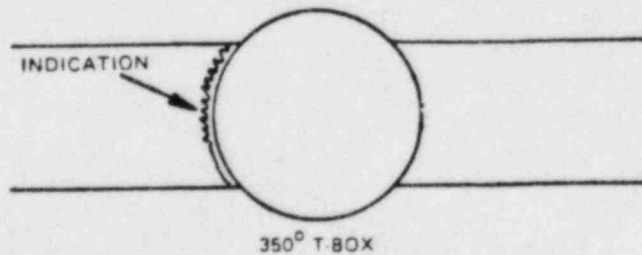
Elevation View of Cracked Core Spray Sparger
